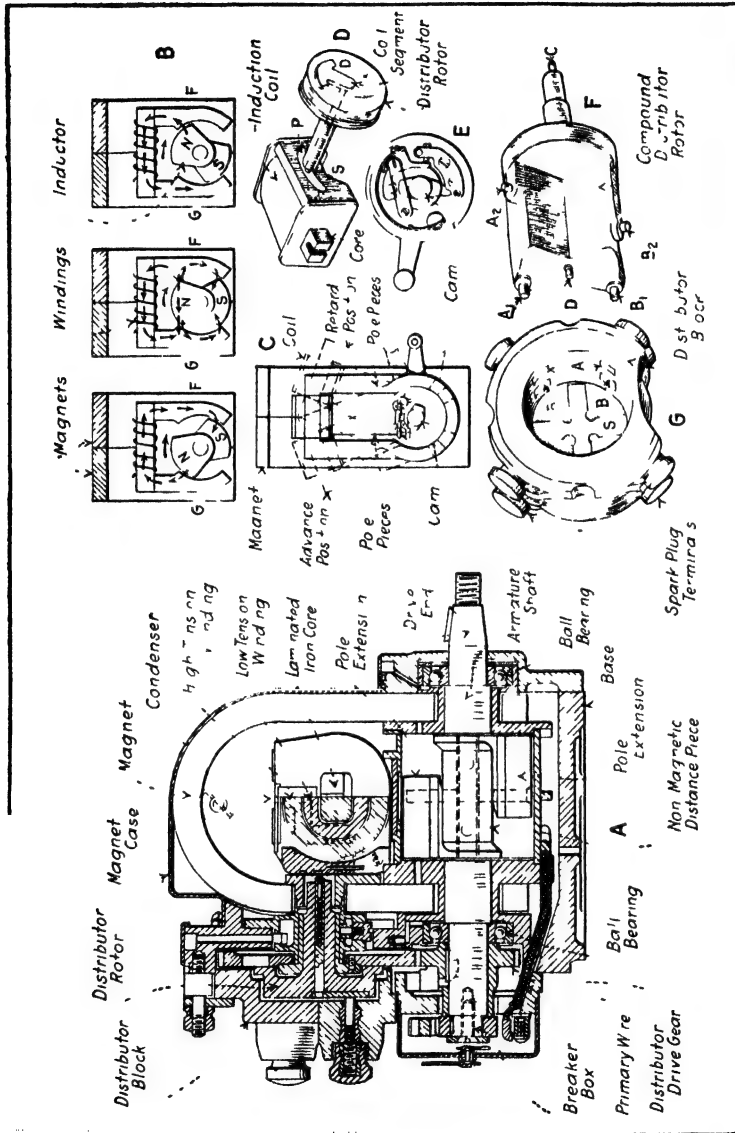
Sectional View Outlining Construction of Dixie Magneto with Compact Distribution for Eight-Cylinder Engine Ignition.
